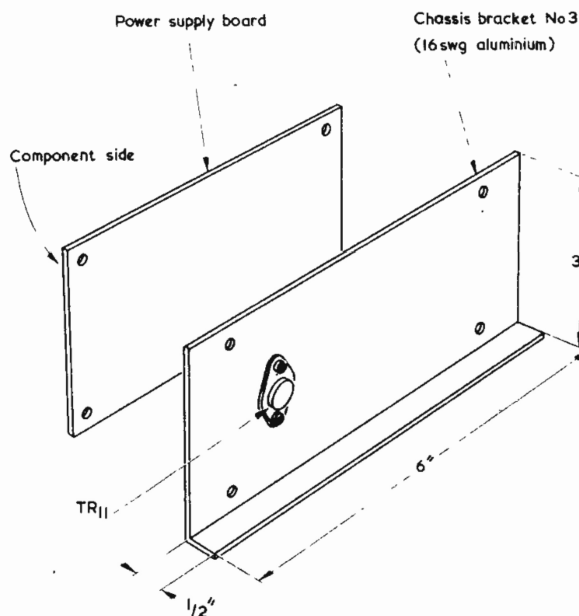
Fitting the power supply board to Chassis Bracket No 3
